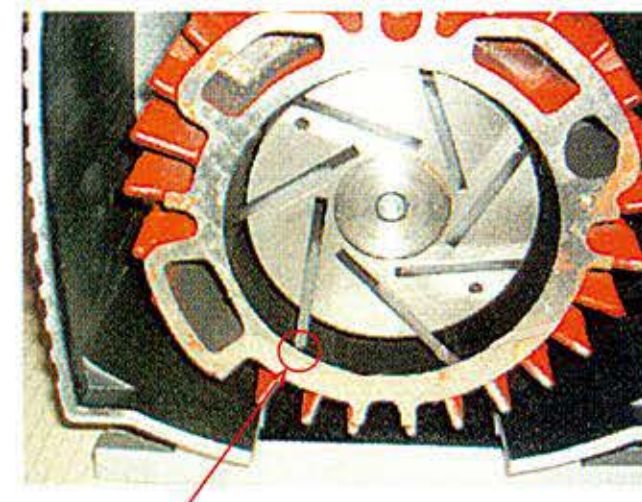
Install the VL(Lid) and tighten 4 socket head screws evenly (Pos.29).
